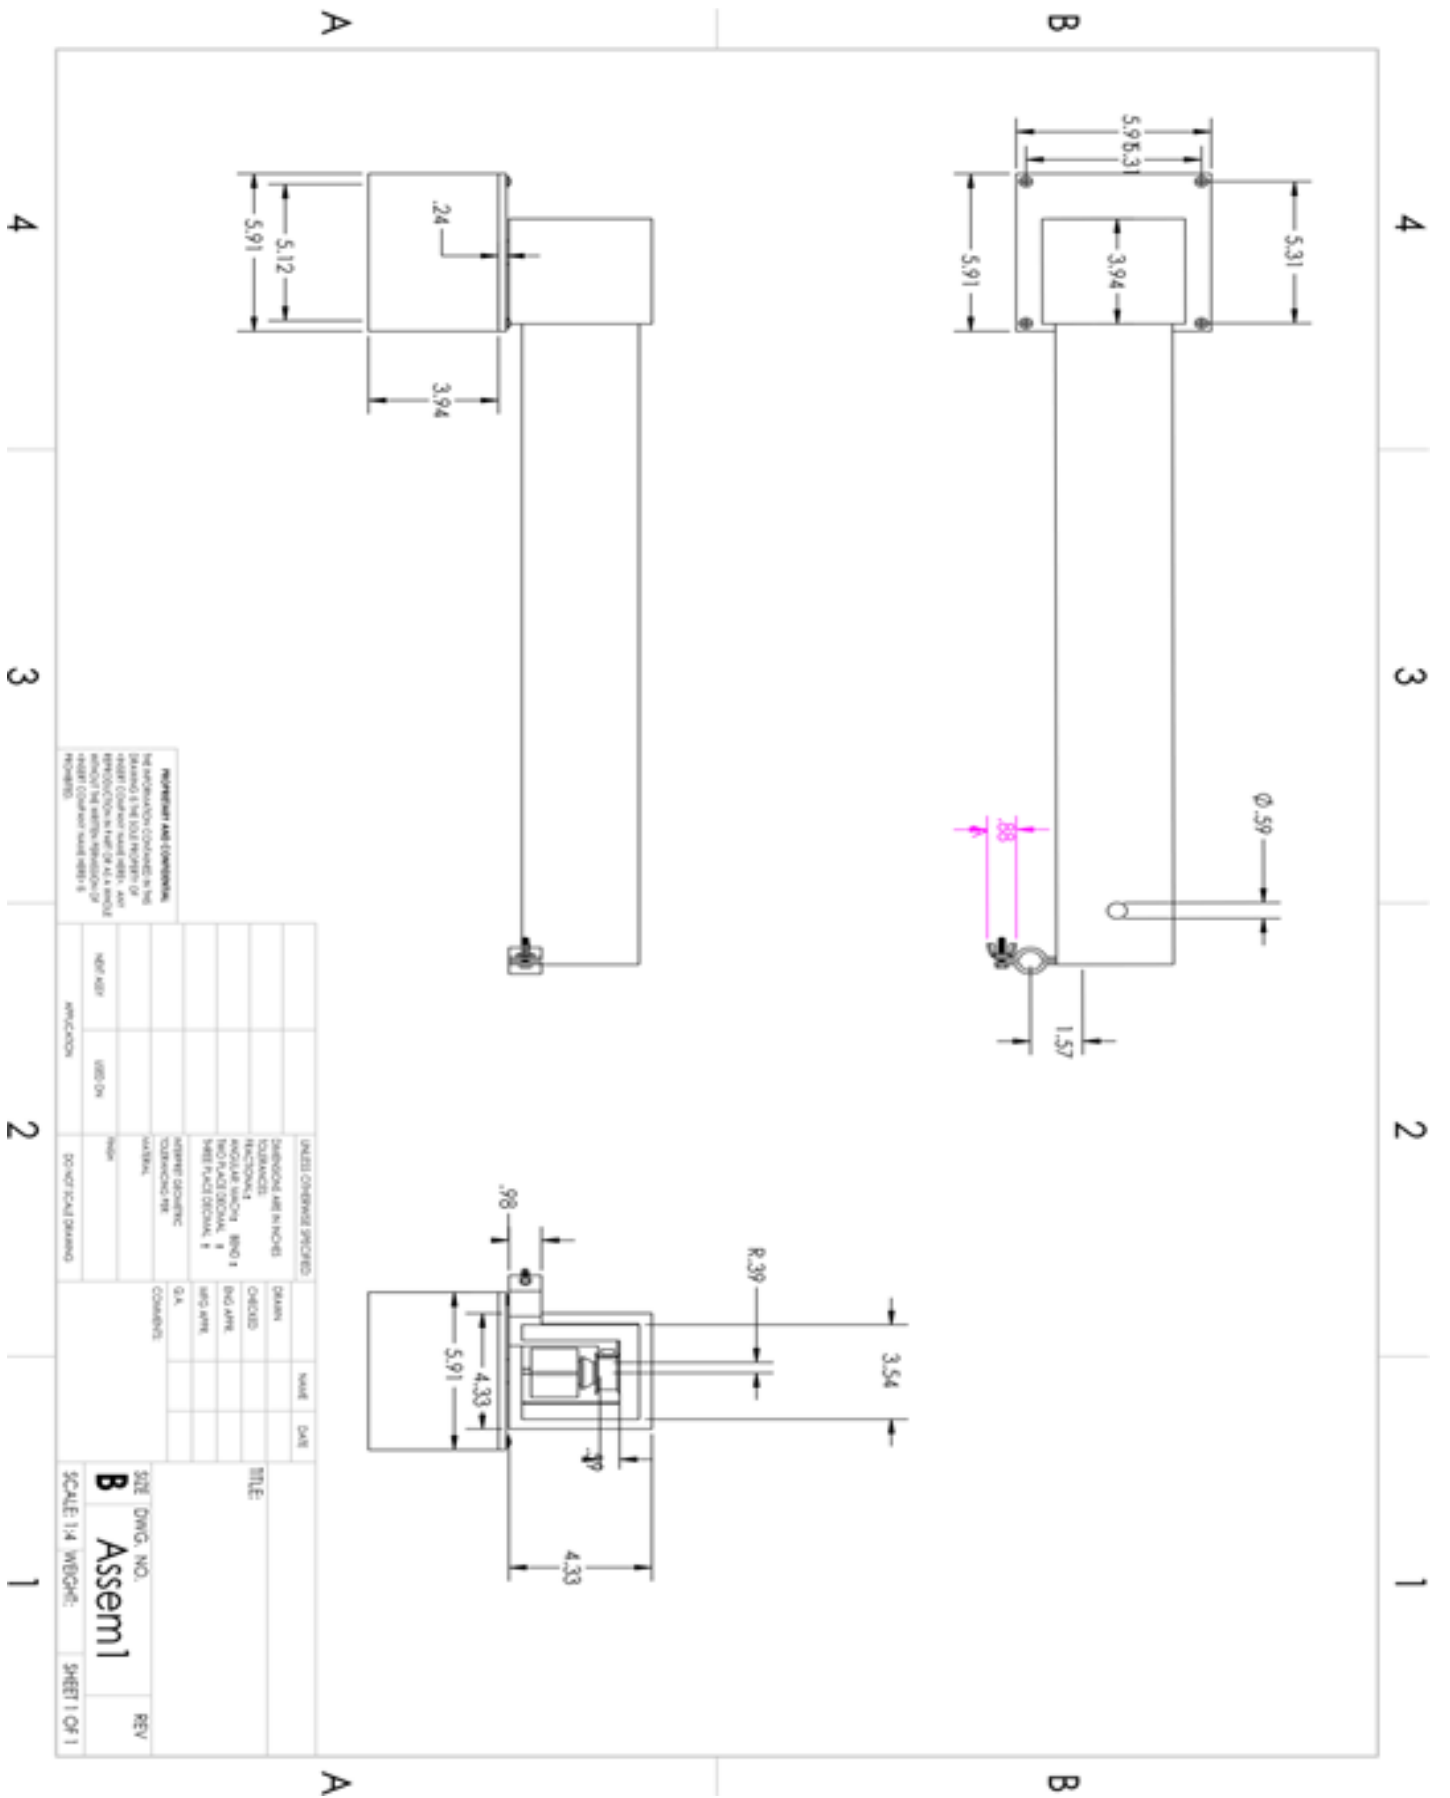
3 views of CAD embodiment of White Board writer with dimensions
